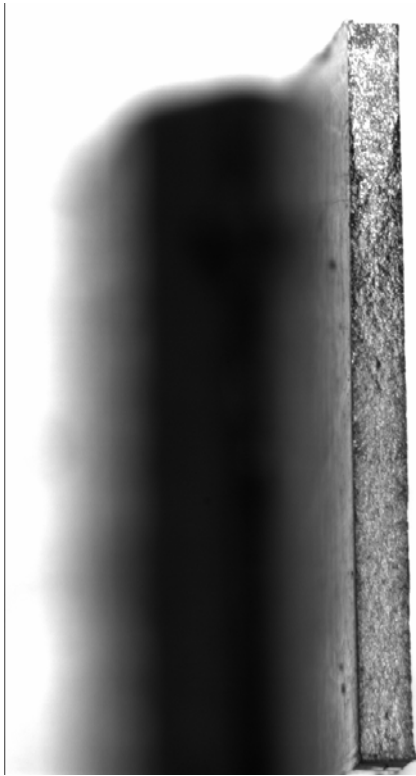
Fracture Surface of Specimen 5869.
